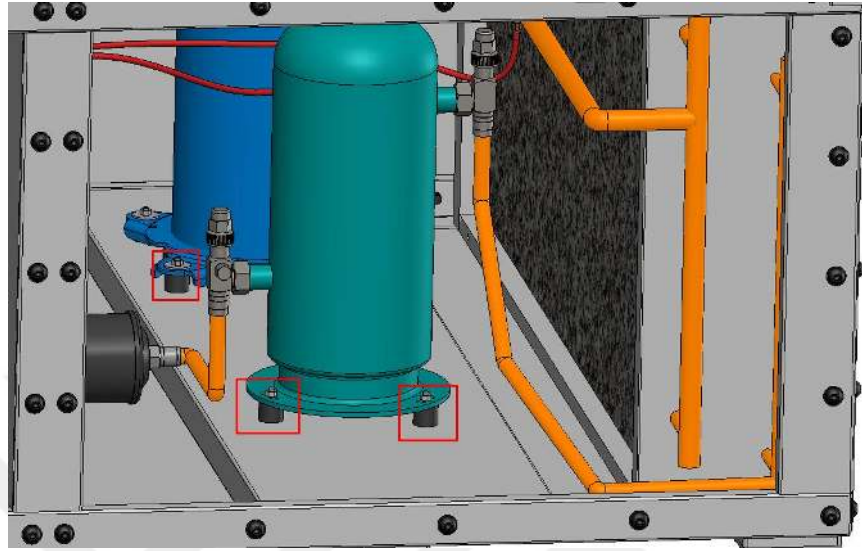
Placement of rubber bolted wedge used for components in the unit
